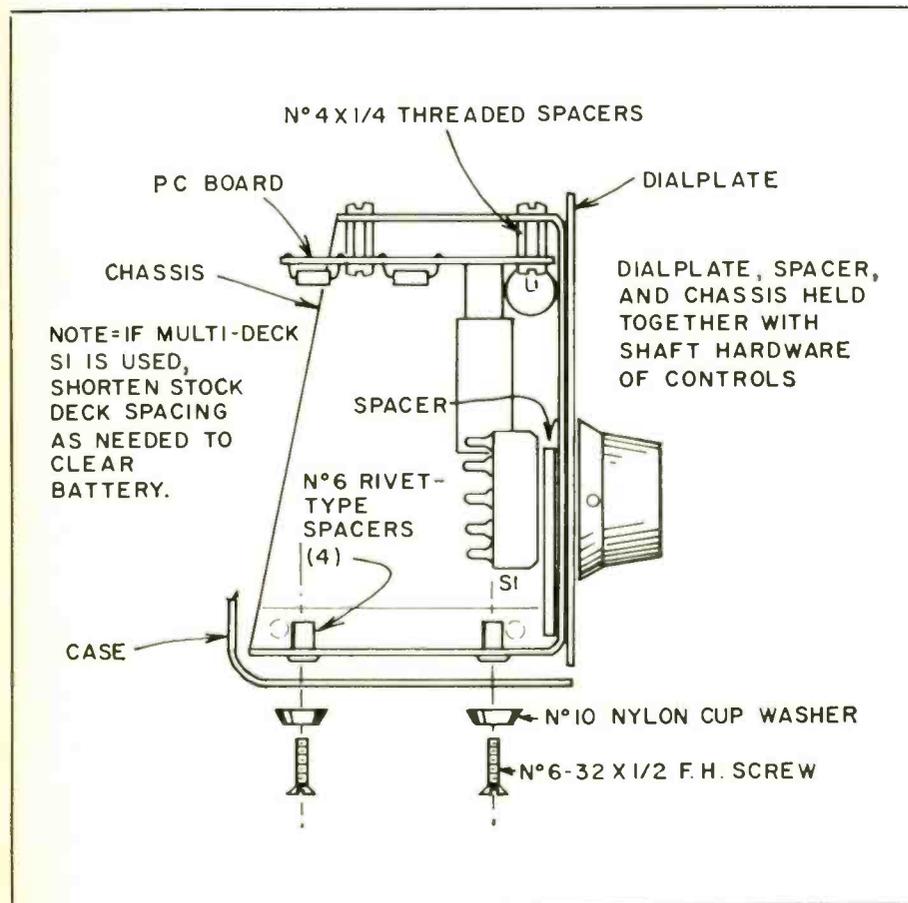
Assemble case, chassis and PC board like this. Be sure switch clears battery.
